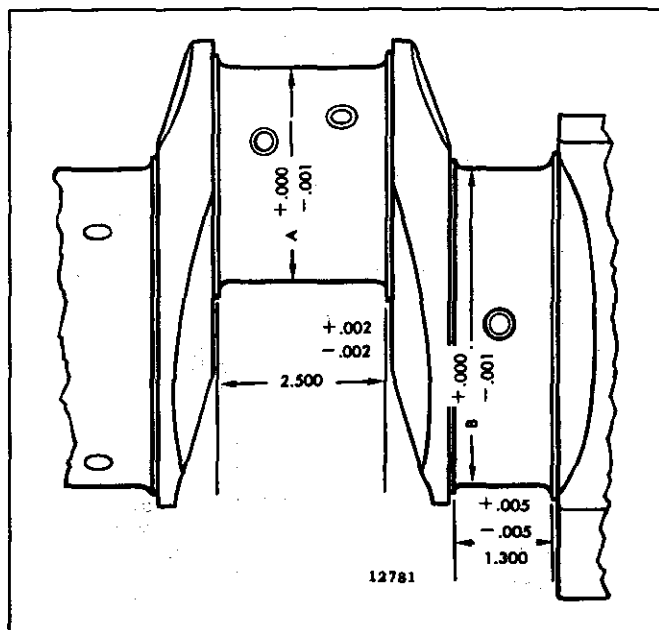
Dimensions of Crankshaft Journals - V-Type Engine
